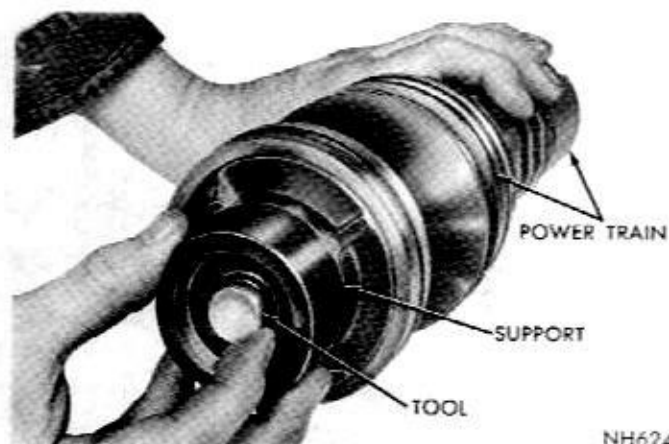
Retaining Bearing Rollers with Arbor Tool
